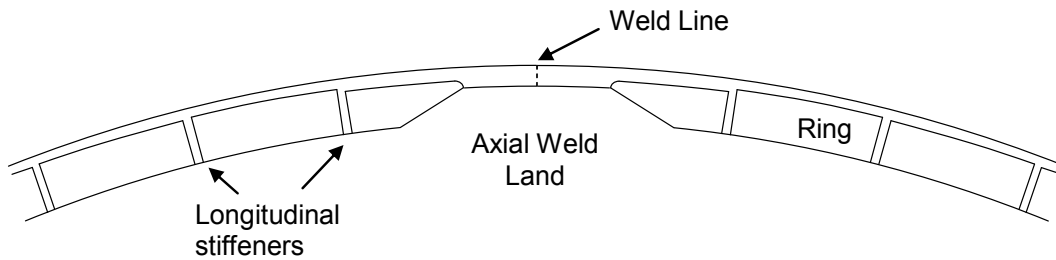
Typical axial weld land geometry for a cylindrical barrel.
